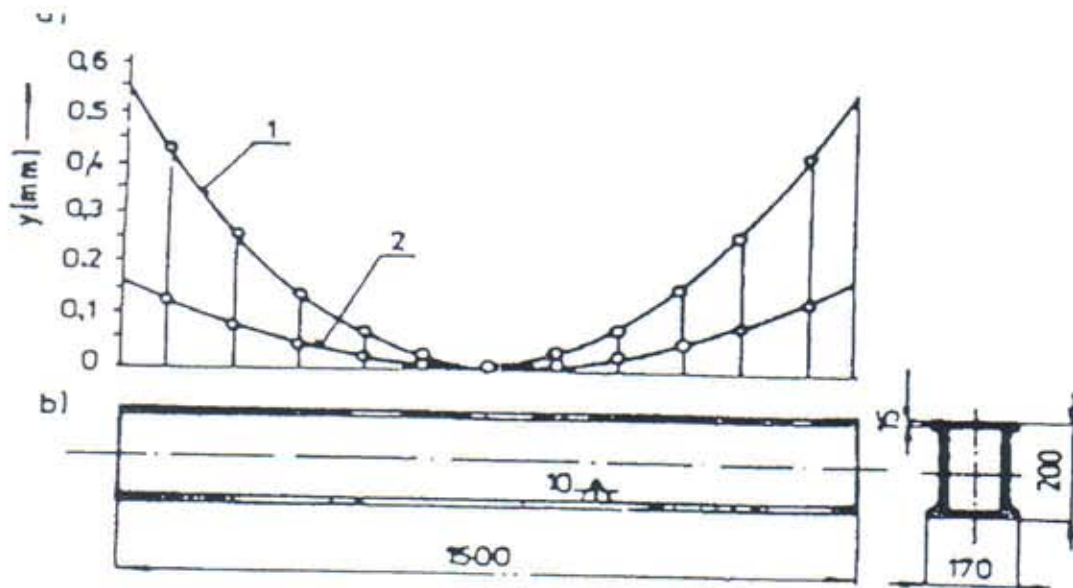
Measured strains "y" of welded beams after machining one flange 5mm in depth, a - longitudinal strains in 1 - as-welded beam, 2 - Vibratory stress relieved beam, b - MMA welded beam of Fe 510 B steel using E 52.33 electrode according to CSN Standard
